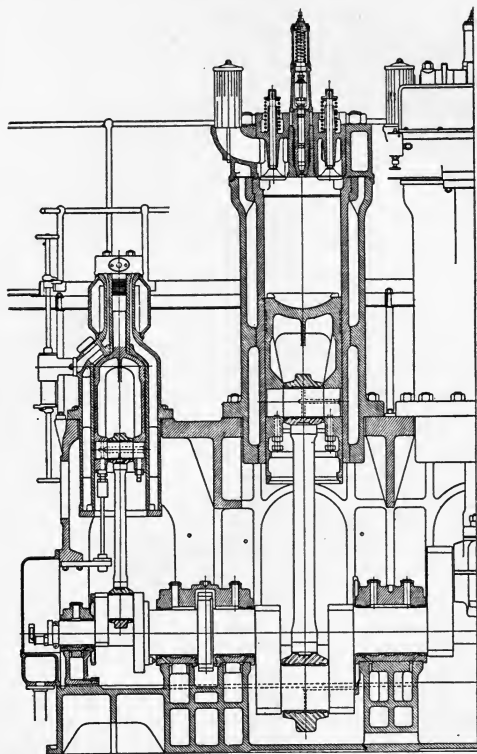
Section of McIntosh & Seymour Oil Engine.
